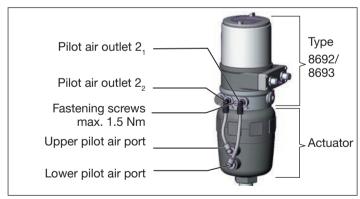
Installation of the pneumatic connections, series 26xx and 27xx
